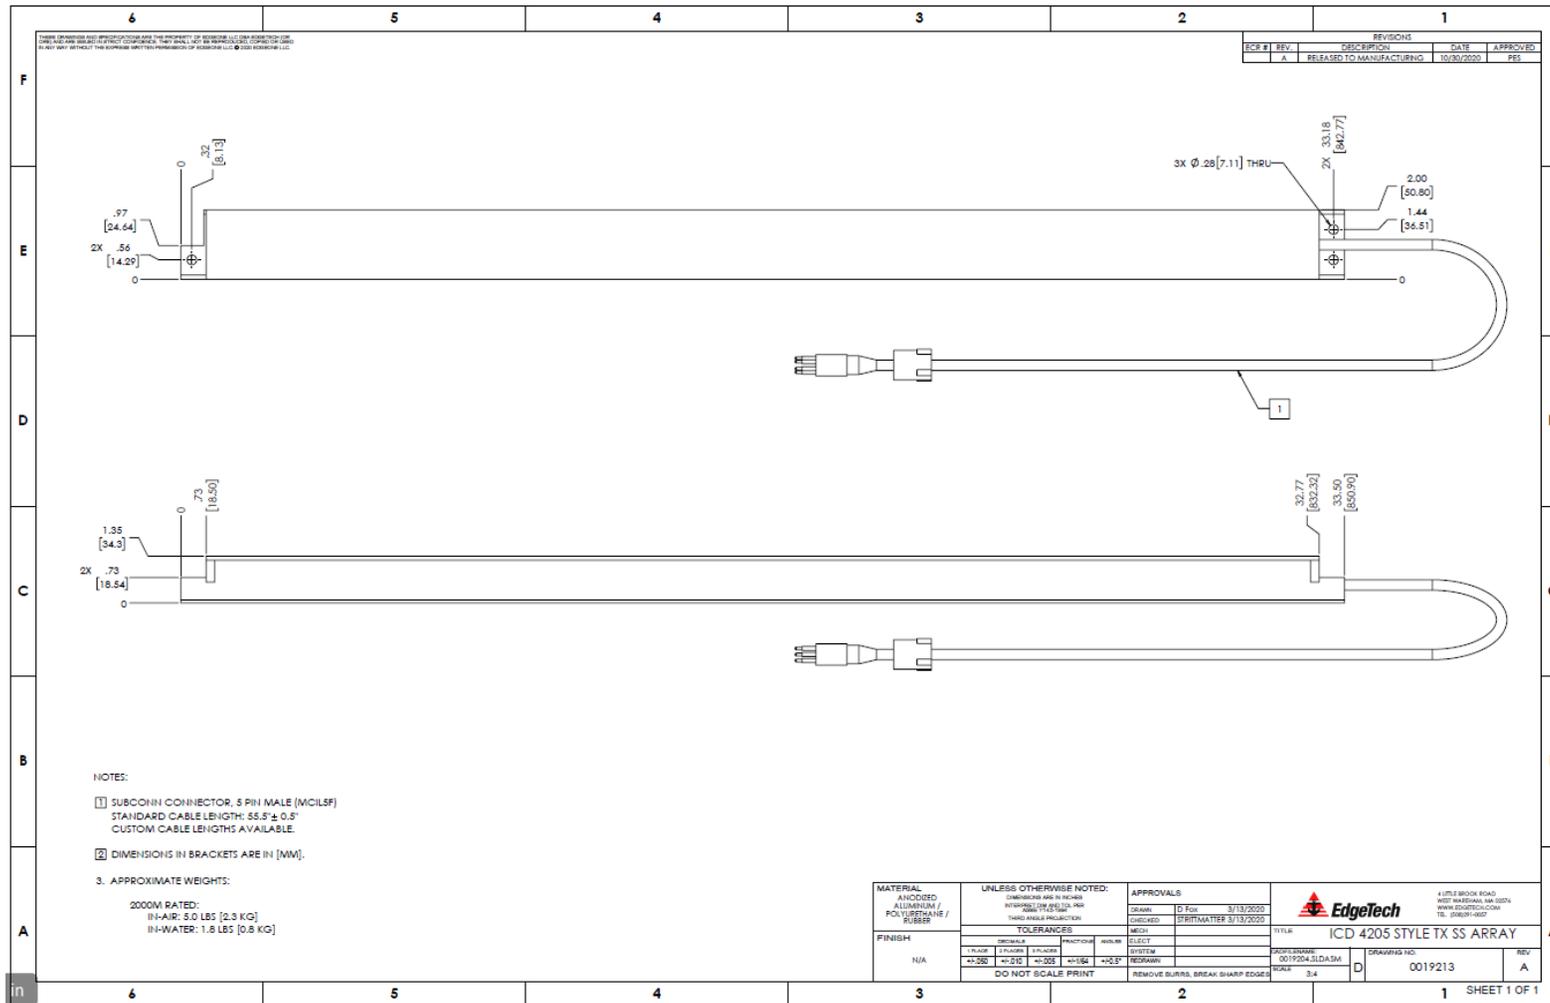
2050-DSS Side Scan Array Drawing (0019213)
